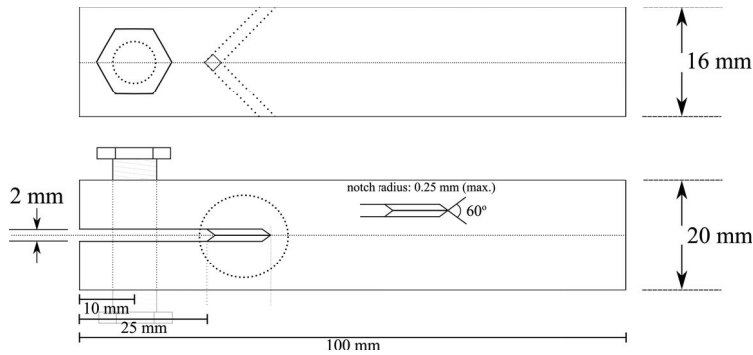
Schematic drawing of the DCB specimens used in this work. Originally from [34].
